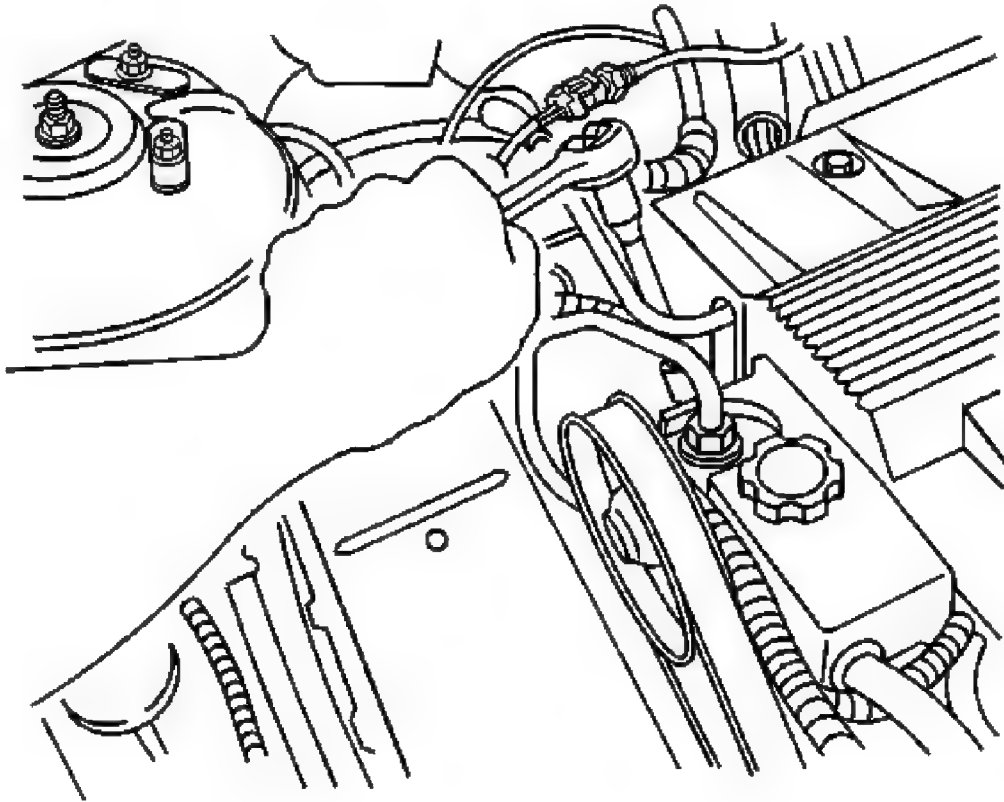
Identifying Power Steering Pump Mounting Bolt
